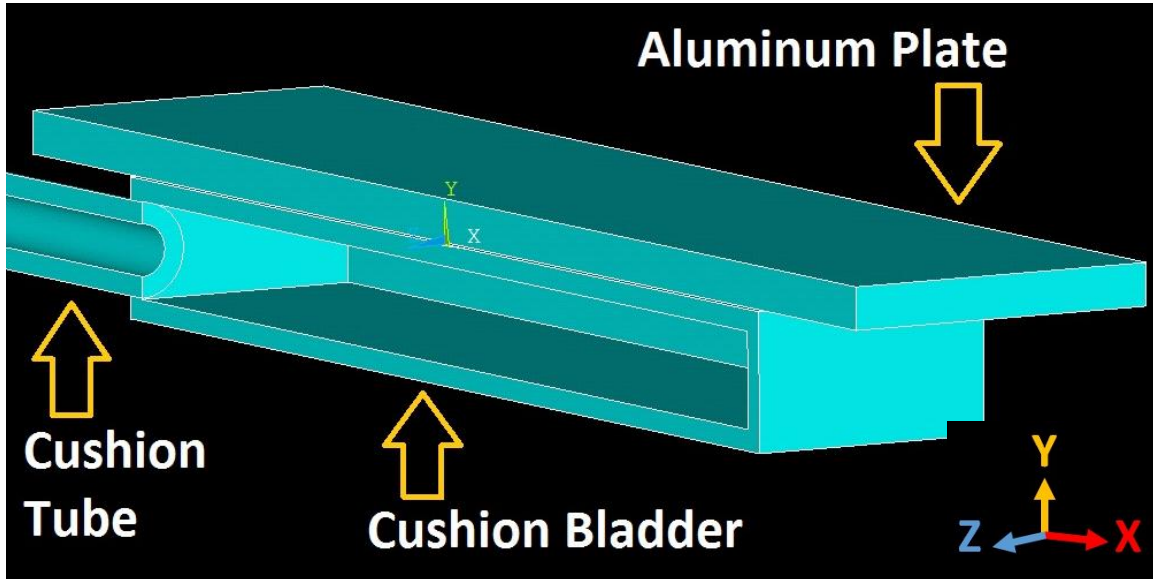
Cross-section view of the cushion tube, bladder, and aluminum plate.
